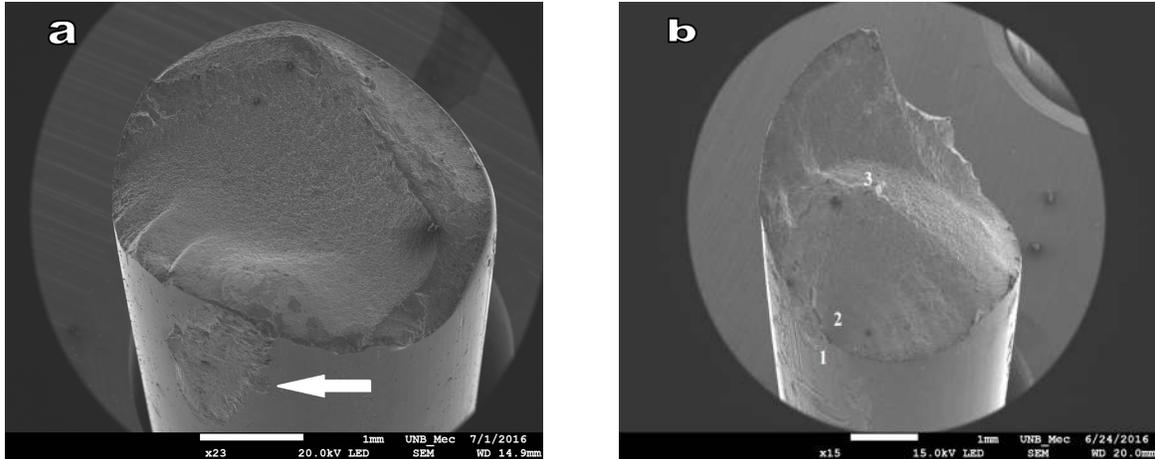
SEM image of fretting fatigue crack origin of conductor “B”, indicated by the arrow (left) and fracture surface of aluminum wire of cable “A” showing fatigue fracture regions (right).
